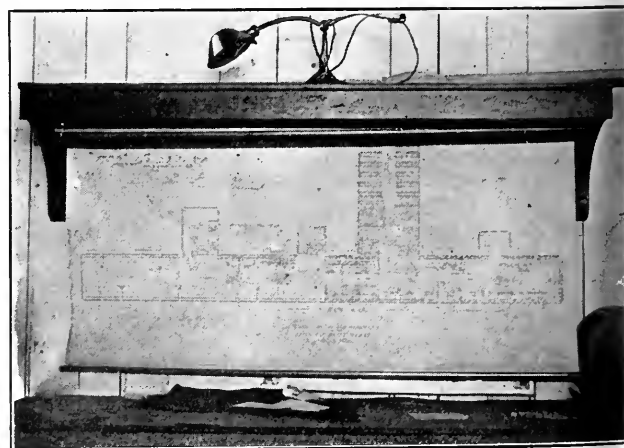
SCALE DRAWING OF MOTOR LAYOUT
